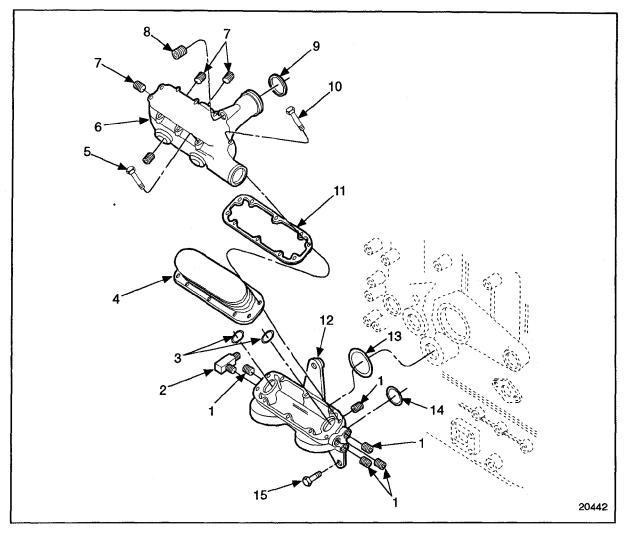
Lubricating Oil Cooler (1991 and Later Engines)
